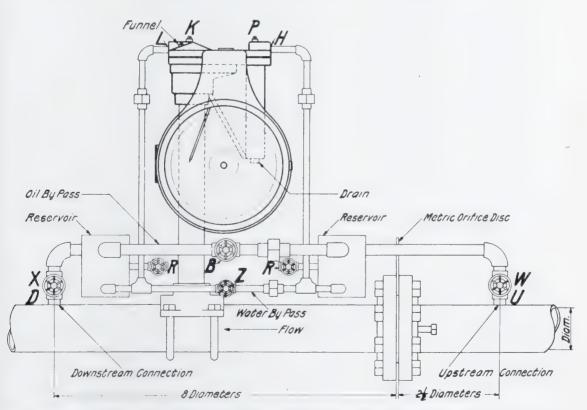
OR 100 INCH GAUGE INSTALLATION FOR MEASURING OIL
